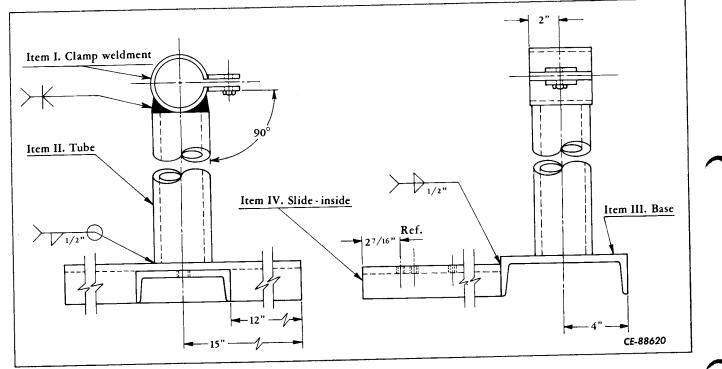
B. Stand Weldment Assembly - Left Hand (1 Required). (Details Shown in Figures 6-86, 6-87, 6-88 and 6-90.)
